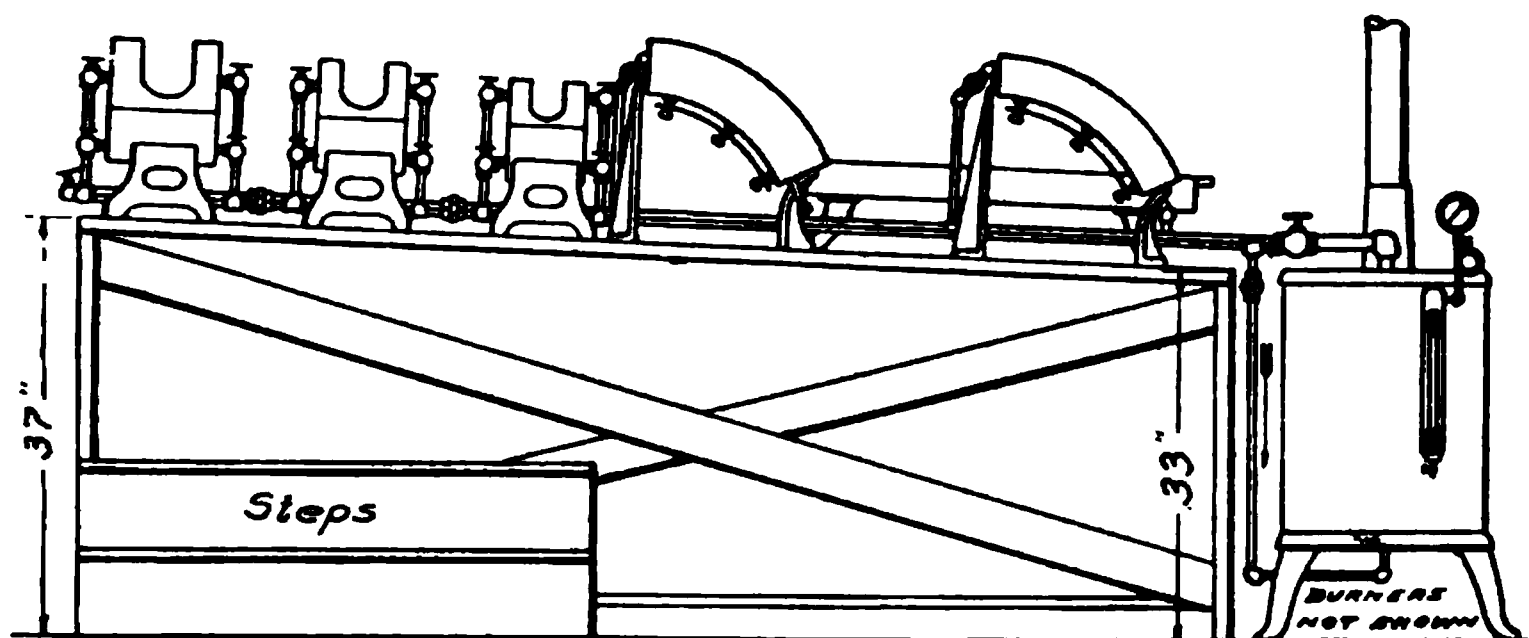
Elevation of Gravity-Return Vulcanizing Plant
